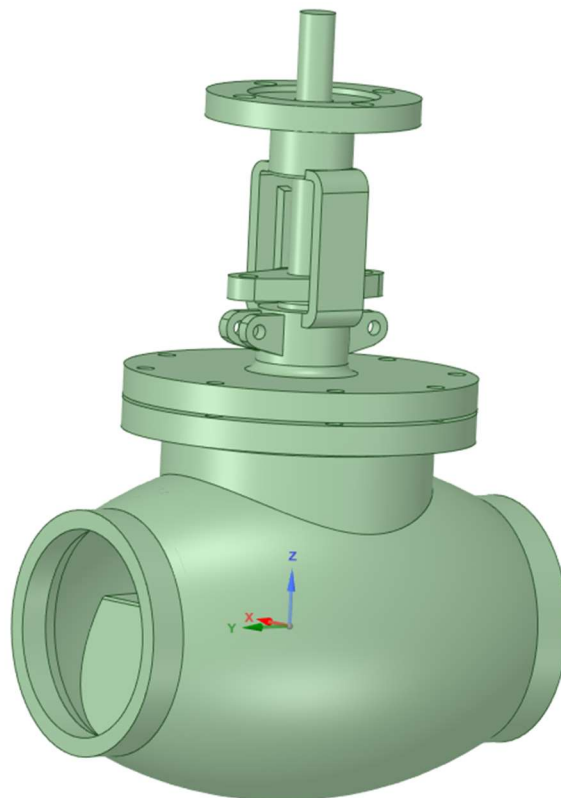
Illustration of the actual butt-welded valve to be used in the analysis.
